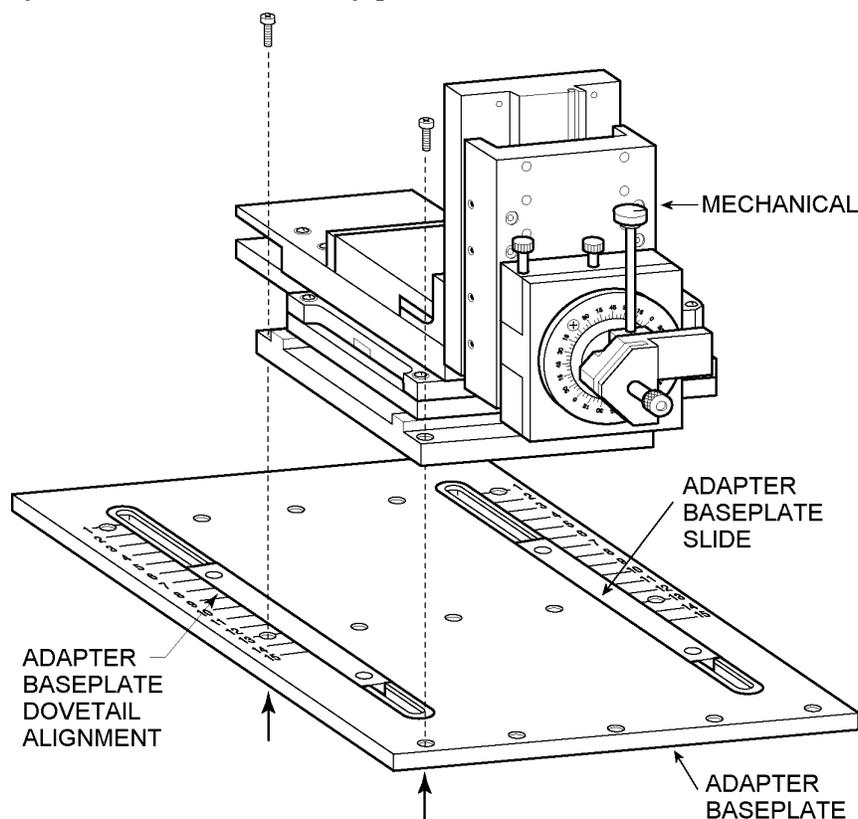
Mounting the right-handed manipulator to the far-left corner of the adapter plate.
